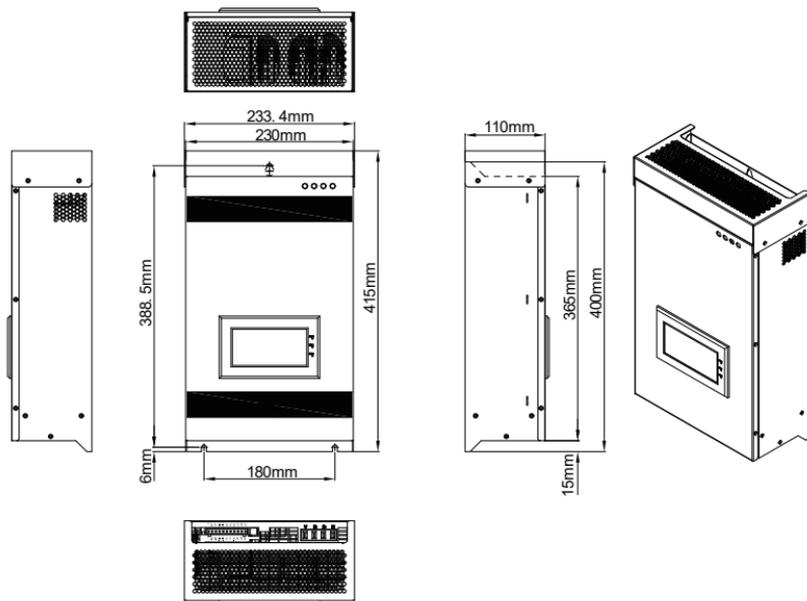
Outline Dimension Drawing of 10kVar/15kVar/20kVar SVG Module
